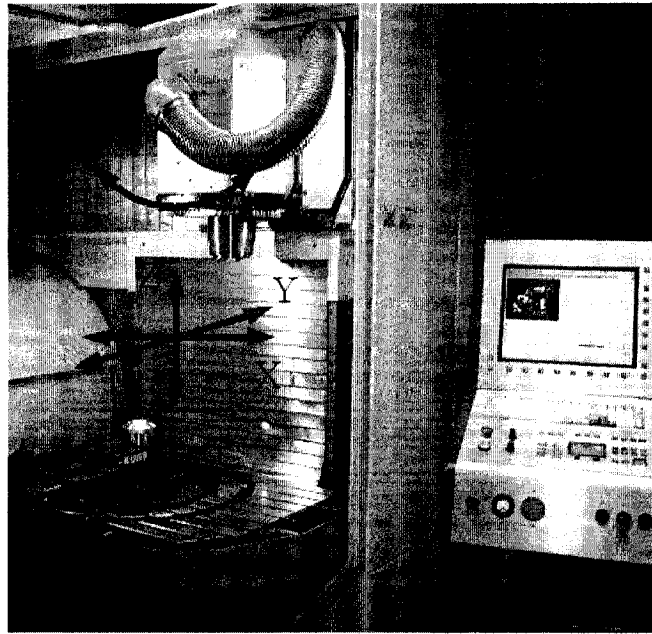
Five-axis Deckel Maho DMU 60T CNC machining center
